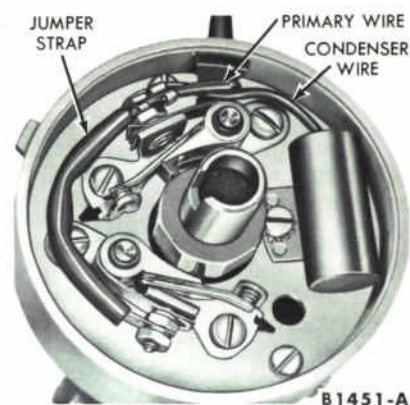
Centrifugal Advance Distributor—Dual Breaker Point Installation
